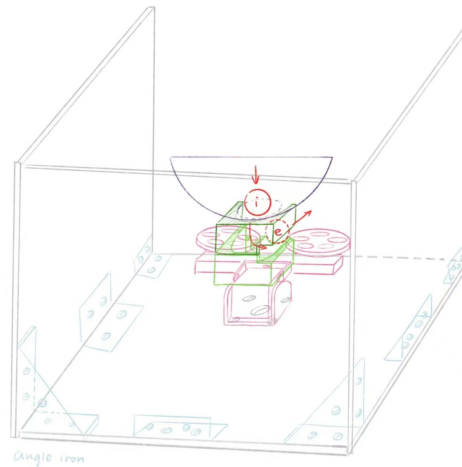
Initial design of the turret before changing it to the iron plate based turret.
